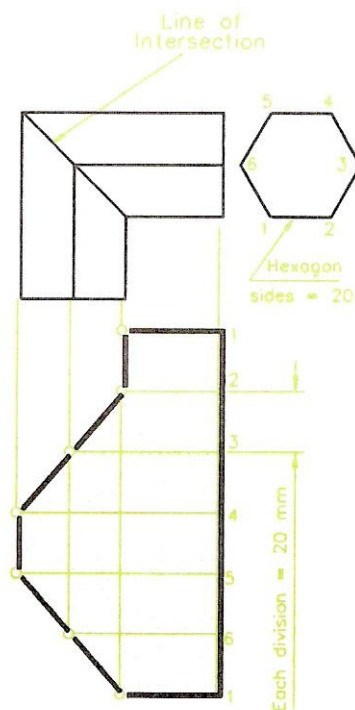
Seam on Shortest Side again to Facilitate Welding
